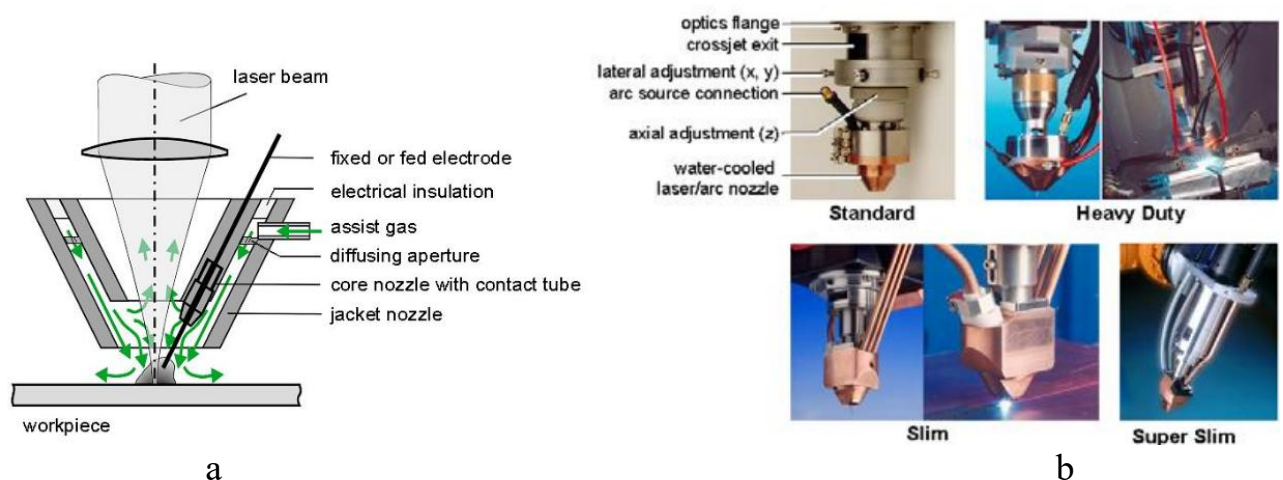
Integrated hybrid welding nozzle: (a) principle of the integrated hybrid welding nozzle; (b) standard and customized hybridwelding heads with the integrated nozzle design (Petring & Fuhrman, 2004).
